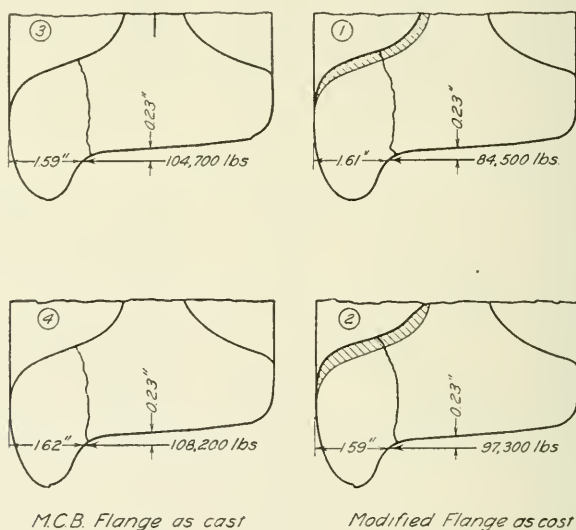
SECTIONS OF CAR WHEELS SHOWING PRESSURE REQUIRED TO BREAK FLANGE; POINT OF LOAD APPLICATION; DIRECTION OF FRACTURE; AND VARIATION IN ULTIMATE STRENGTH DUE TO THICKENING TREAD.
